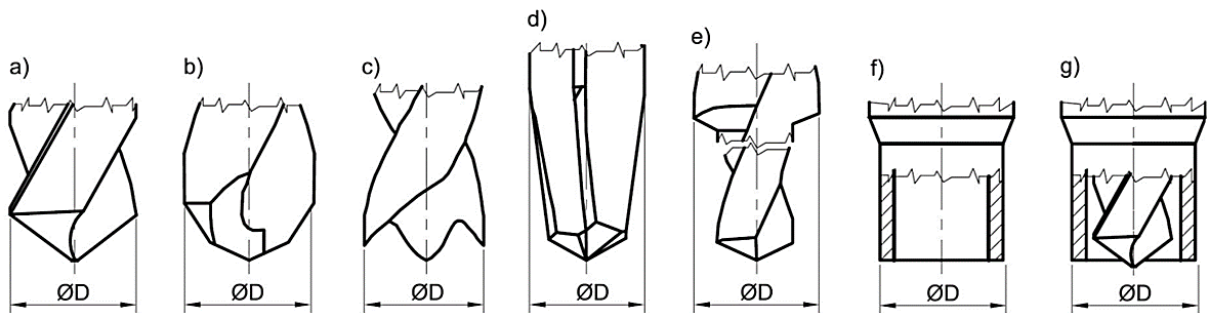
Schematic drawings of different drilling tools for CFRPs: (a) conventional twist drill, (b) double point angle twist drill, (c) brad & spur drill (candlestick drill), (d) dagger drill (one-shot drill), (e) step drill, (f) core drill and (g) the special core drill [42]
